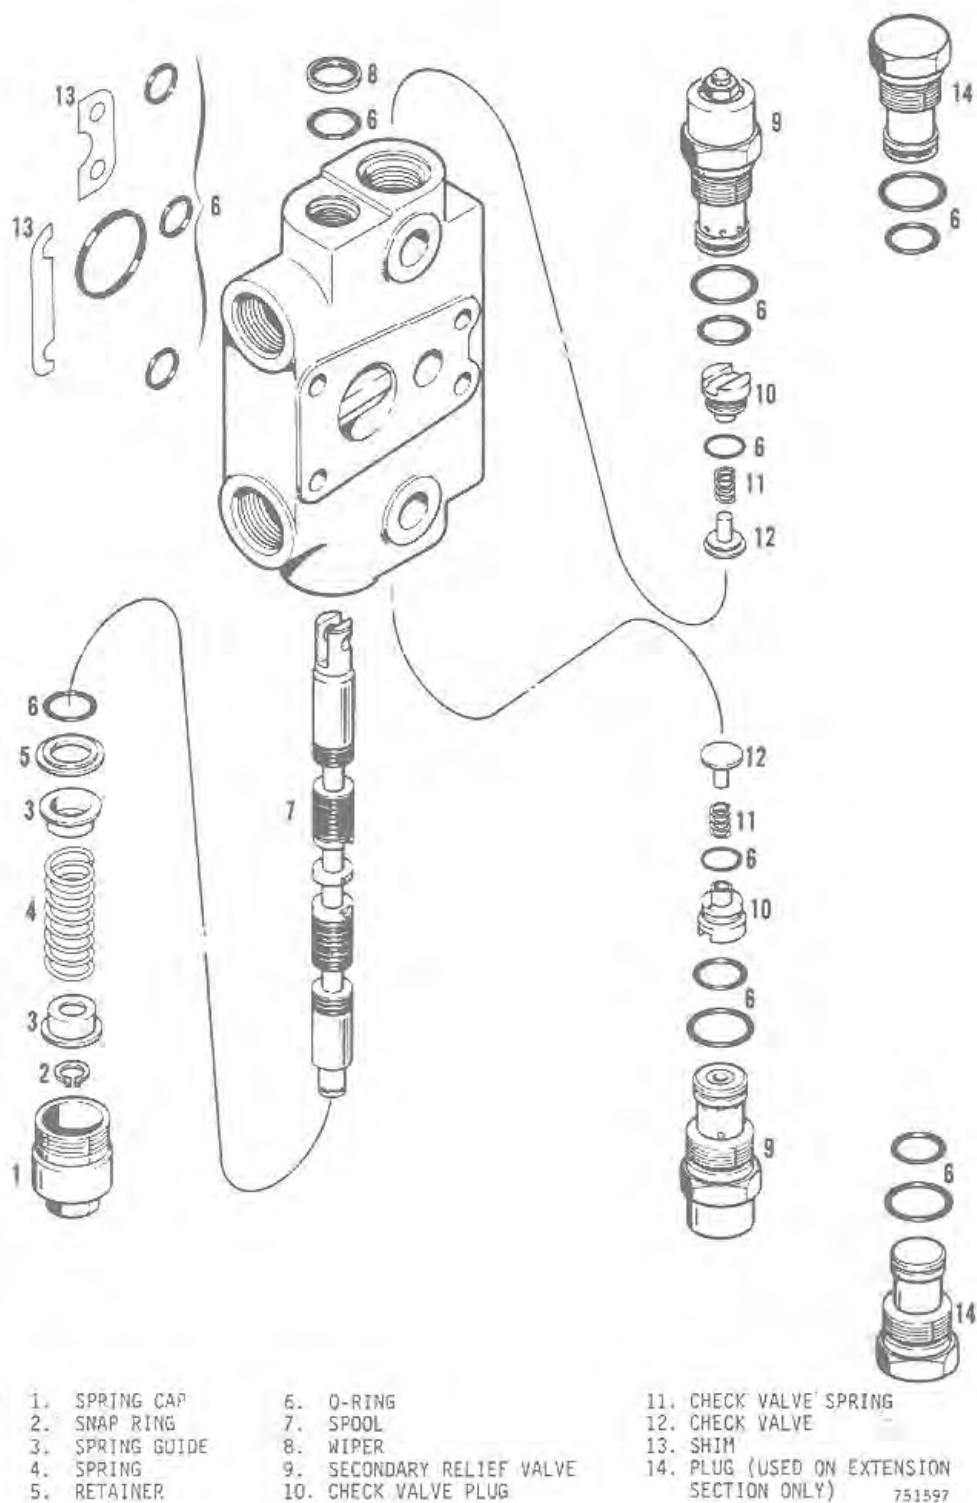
Boom, Dipper, Bucket and Extension Valve Sections
